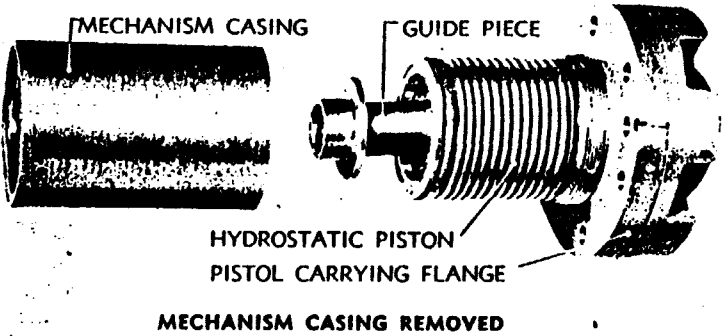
Disassembly of Pistol for Insertion of Auxiliary Depth Spring, FUZE, AN-Mk. 224
